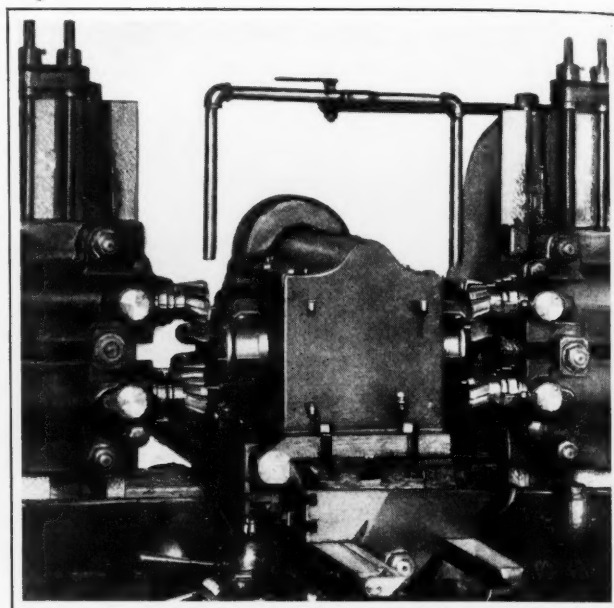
Set-up for Automatically Milling Circular Clearance on Flange Yokes
